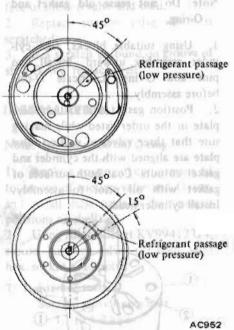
Relative Position between Cylinder Head and Front Cover
